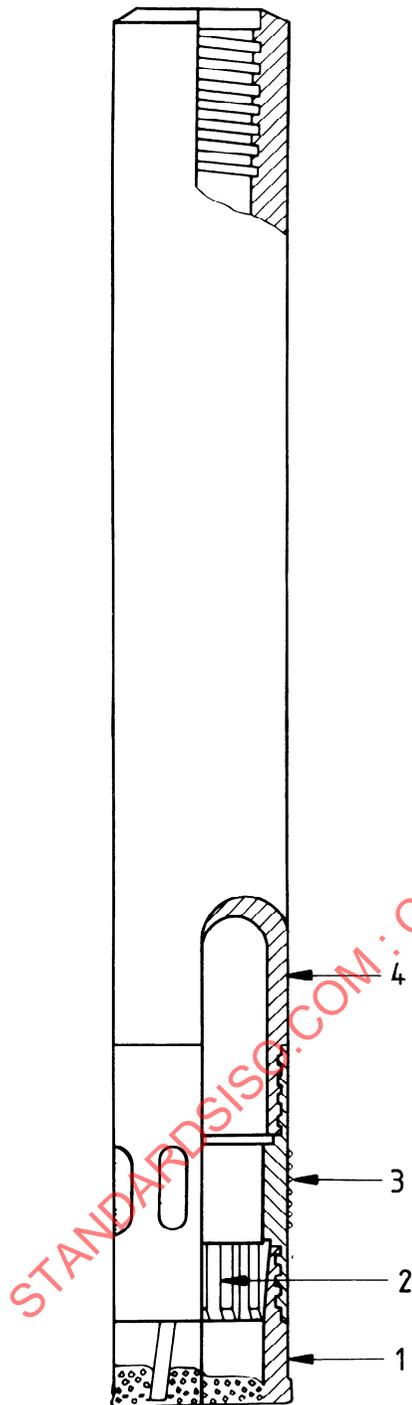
"WF" design double-tube core barrel — Head (see table 27)
